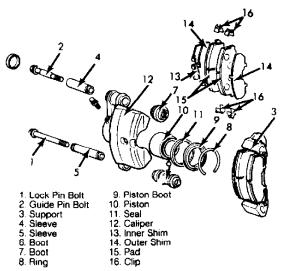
Exploded View of Front Disc Brake Assembly (Typical) Courtesy of Chrysler Motors.
